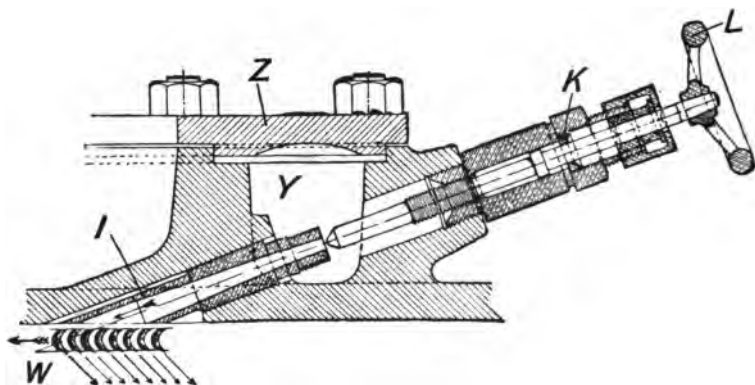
Nozzle and Vanes of a De Laval Turbine.
